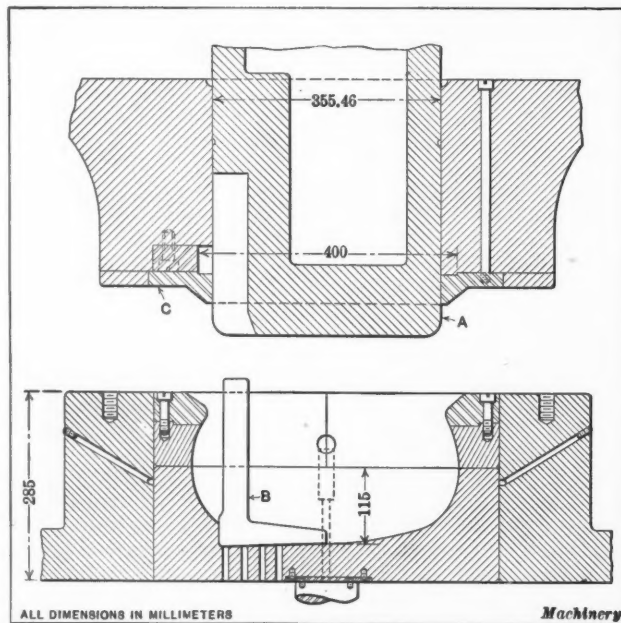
Sectional View of the Bulging Die shown in Fig. 2
